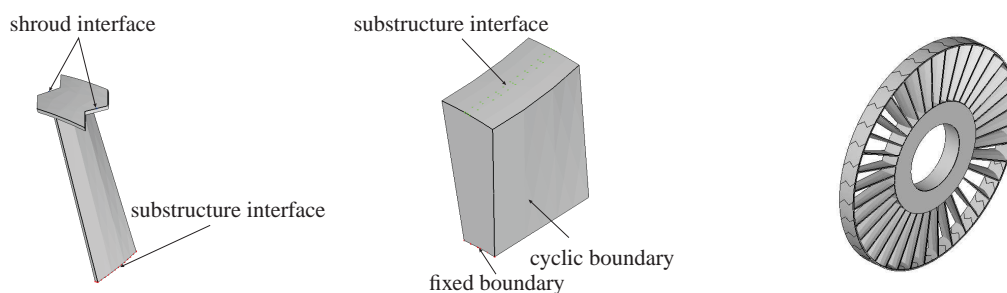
Blade-, disk-components and assembly of the finite-element model.
